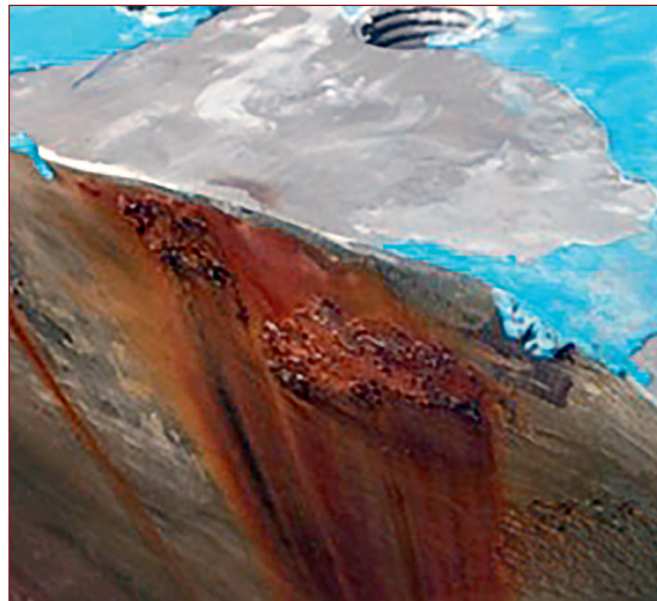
Crevice corrosion at a flanged joint in a grade 6A superduplex casting.
